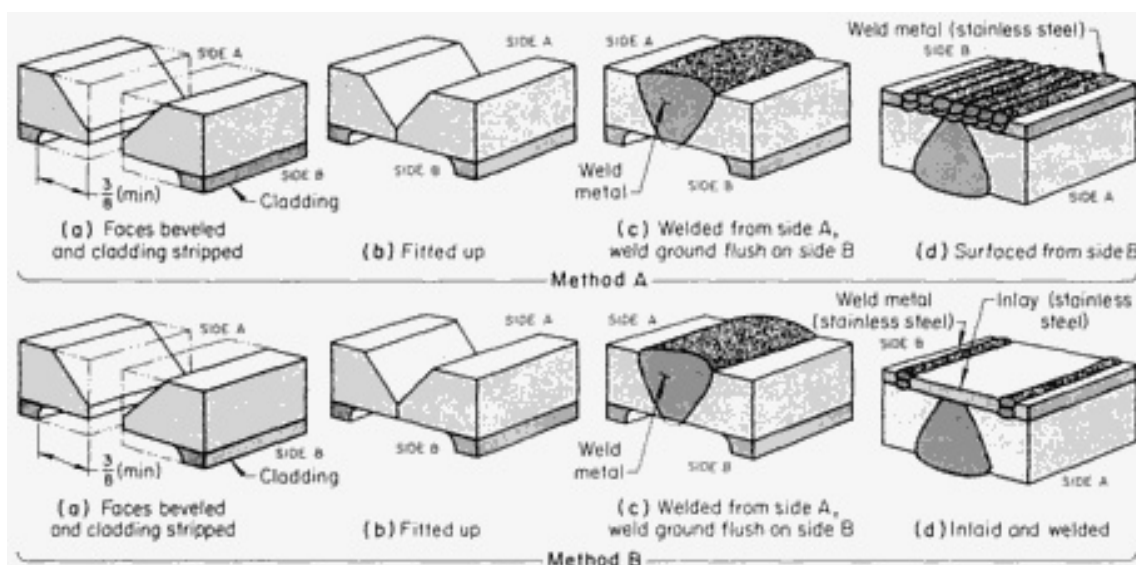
ALTERNATIVE PROCEDURES FOR JOINING STAINLESS-CLAD CARBON AND LOW-ALLOY STEEL PLATE INVOLVING DIFFERENT TECHNIQUES FOR REPLACING PORTIONS OF THE STAINLESS STEEL CLADDING REMOVED BEFORE WELDING THE CARBON OR LOW-ALLOY STEEL SIDE. THE JOINT IS PREPARED BY BEVELING SIDE A AND REMOVING A PORTION OF THE STAINLESS STEEL CLADDING FROM SIDE B TO A MINIMUM WIDTH OF 9.5 MM ($\frac{3}{8}$ IN.) FROM EACH SIDE OF THE JOINT, AND THE JOINT IS FITTED UP IN POSITION FOR WELDING.
